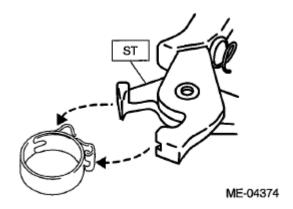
Identifying ST 18353AA000 Clamp Pliers Courtesy of SUBARU OF AMERICA, INC.
